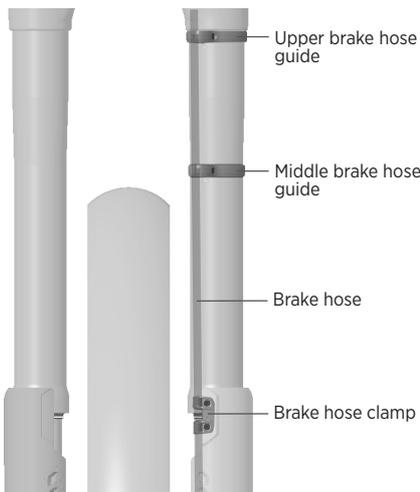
Brake hose routing through brake hose guides and into brake hose clamp
